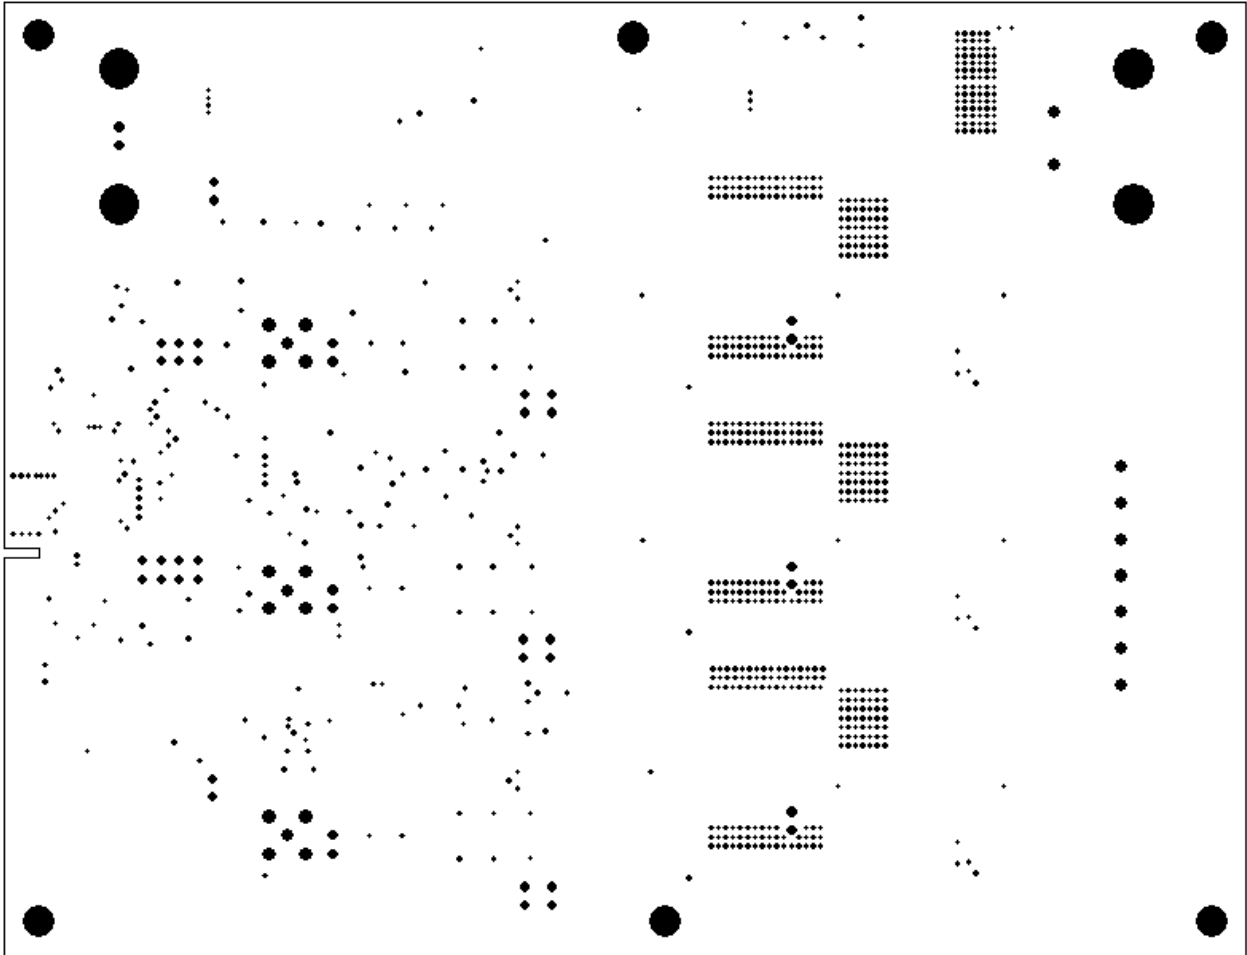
EPC7C006/FBS-GAM02 3-Phase Motor Driver Eval. Board Drill Pattern.
